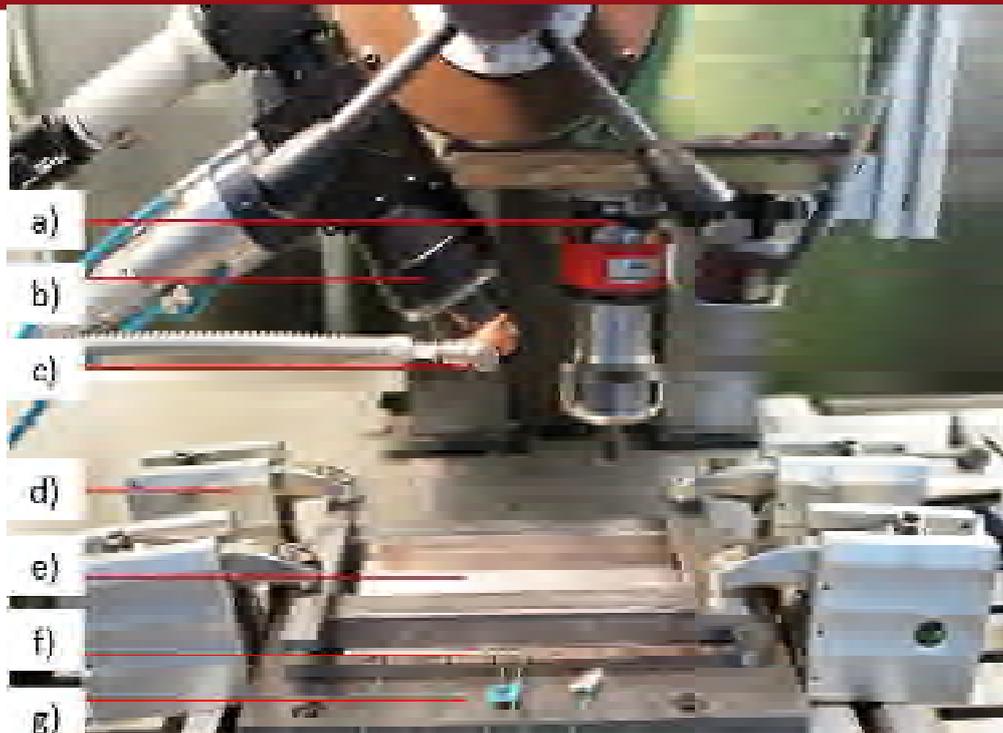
experimental setup welding system: a) axial force and torque measurement system (tool holder; sensor), b) laser, c) crossjet, d) clamping elements, e) workpieces, f) arrestor, g) base plate.
